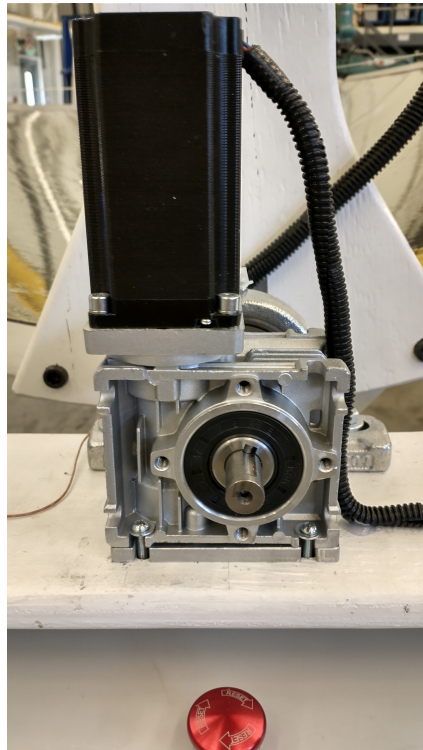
3.0 Nm NEMA 23 stepper motor connected to NMRV 80:1 wormdrive gearbox mounted to trough shaft
